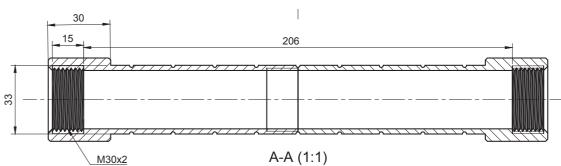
Dimensions of the Main body; Prototype 1 (mm) (Autodesk Fusion 360) (section view in Figure Fix)
